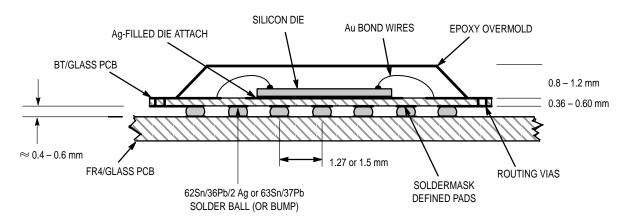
Cross-Sectional View of an PBGA Mounted to a PCB
